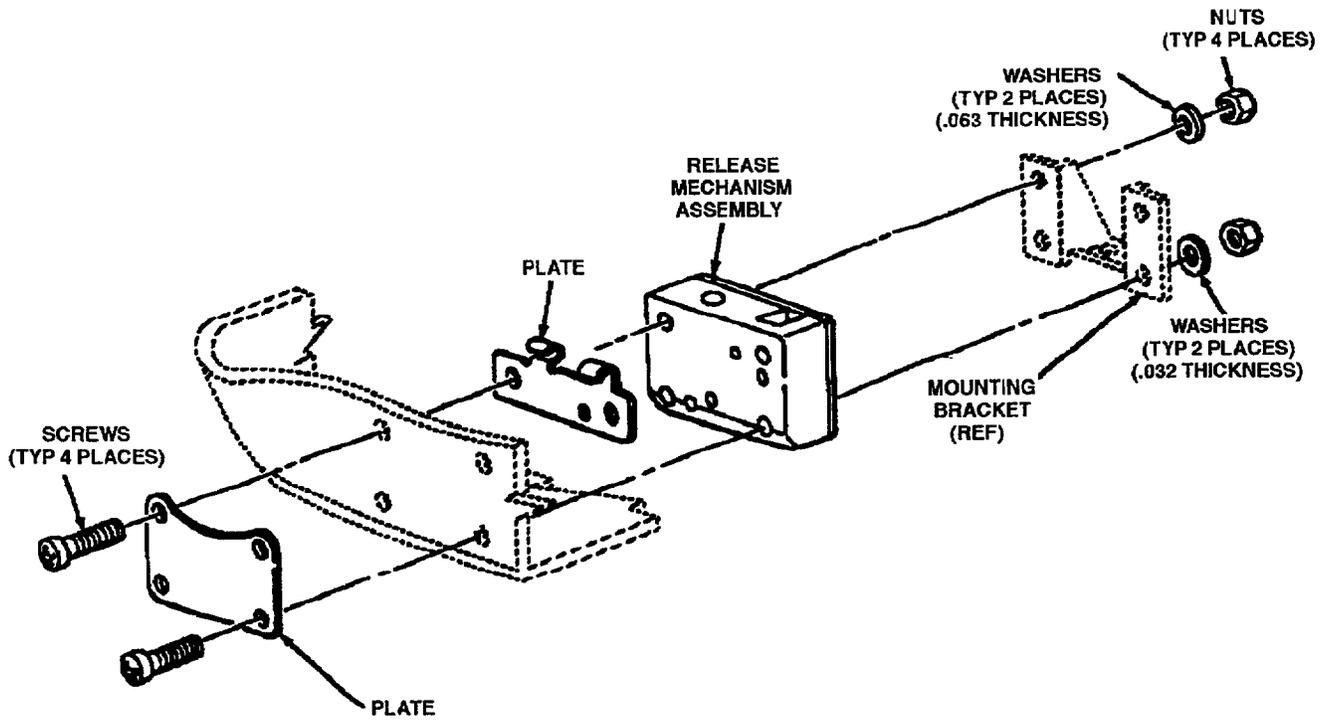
External Pilot Parachute Release Assembly, Exploded View
